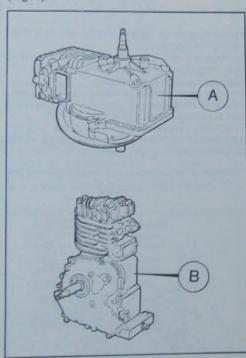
A = Short-block vertical shaft engine B = Short-block horizontal shaft engine
